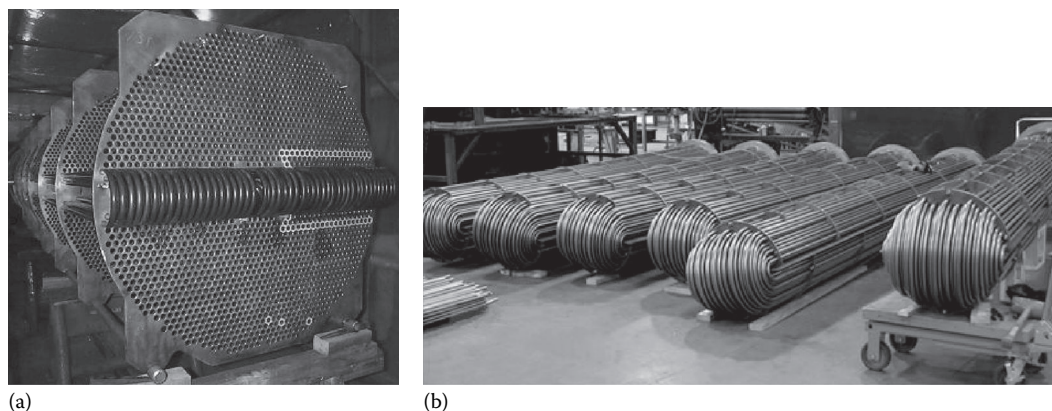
(a) Insertion of U-tubes through tubesheet (Courtesy of Powerfect, Brick, NJ) and (b) U-tube bundle heat exchangers—on the extreme right, tube bundle is on a movable trolley. (Courtesy of Titan Metal Fabricators Inc, Camarillo, CA.)
